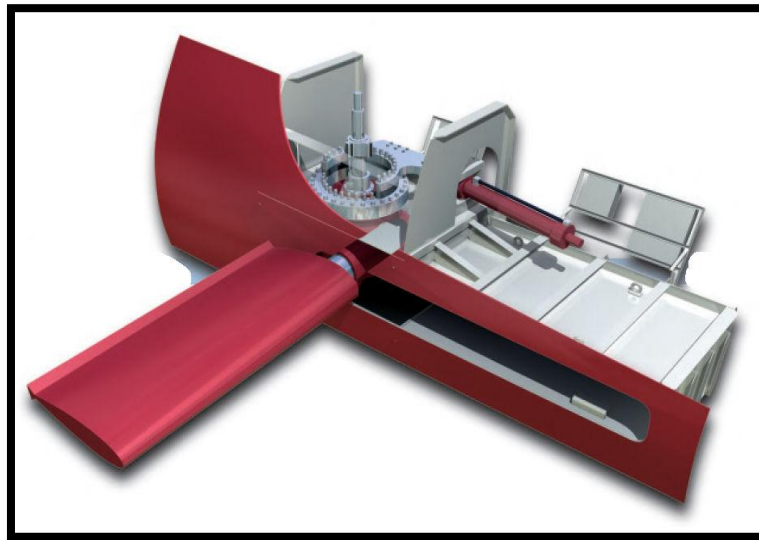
Cut section of a stabilizer and its auxiliary machinery[31]
